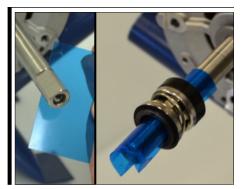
| When installing the rotary seal, wrap Mylar film around motor shaft to prevent damage to the seal.
